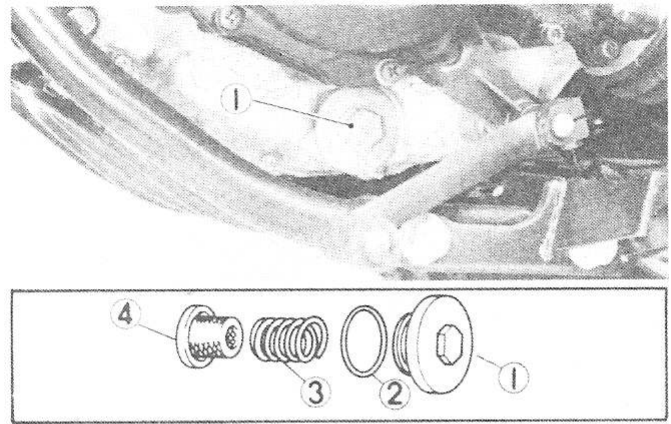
The oil strainer is held in place by a large threaded cover (Sec 9)
